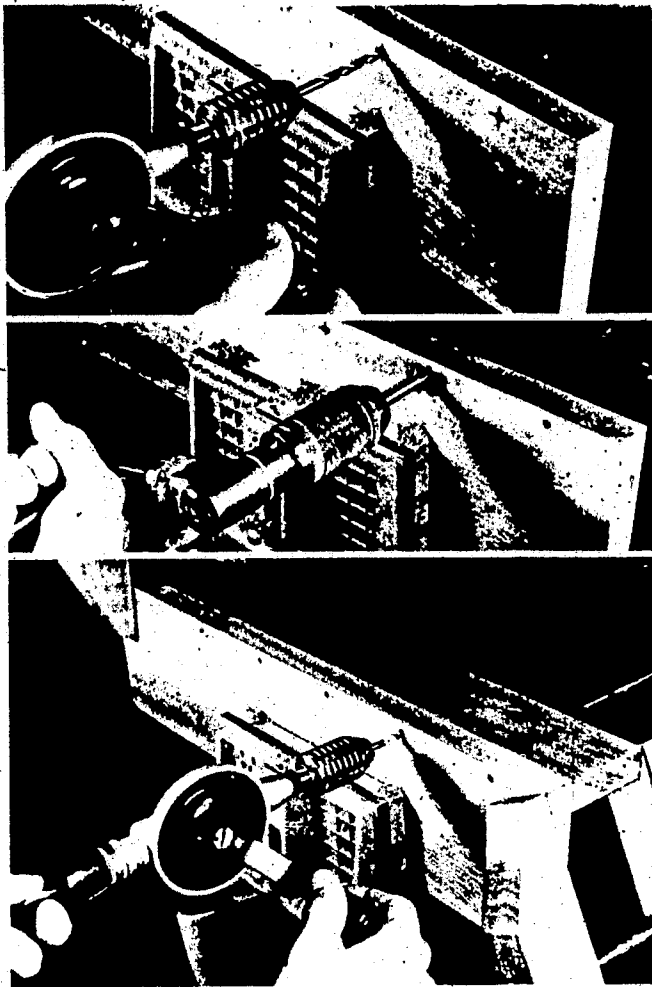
Drilling holes for screws. Above. Shank hole. Center. Countersinking. Below. Pilot hole. Note masking tape wrapped around drill to mark hole depth.
